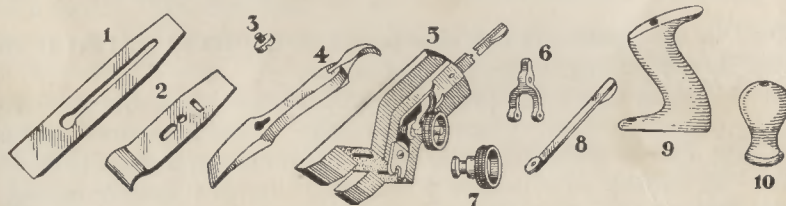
Plane parts. 1, cutter iron; 2, plane-iron cap; 3, cap screw; 4, lever cap; 5, frog; 6, Y adjustment; 7, Y-adjustment screw; 8, lateral-adjustment lever; 9, handle; 10, knob
